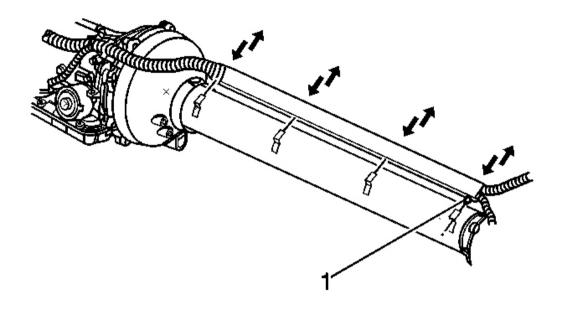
Releasing The Retainer Securing The Wiring Harness Courtesy of GENERAL MOTORS CORP.
